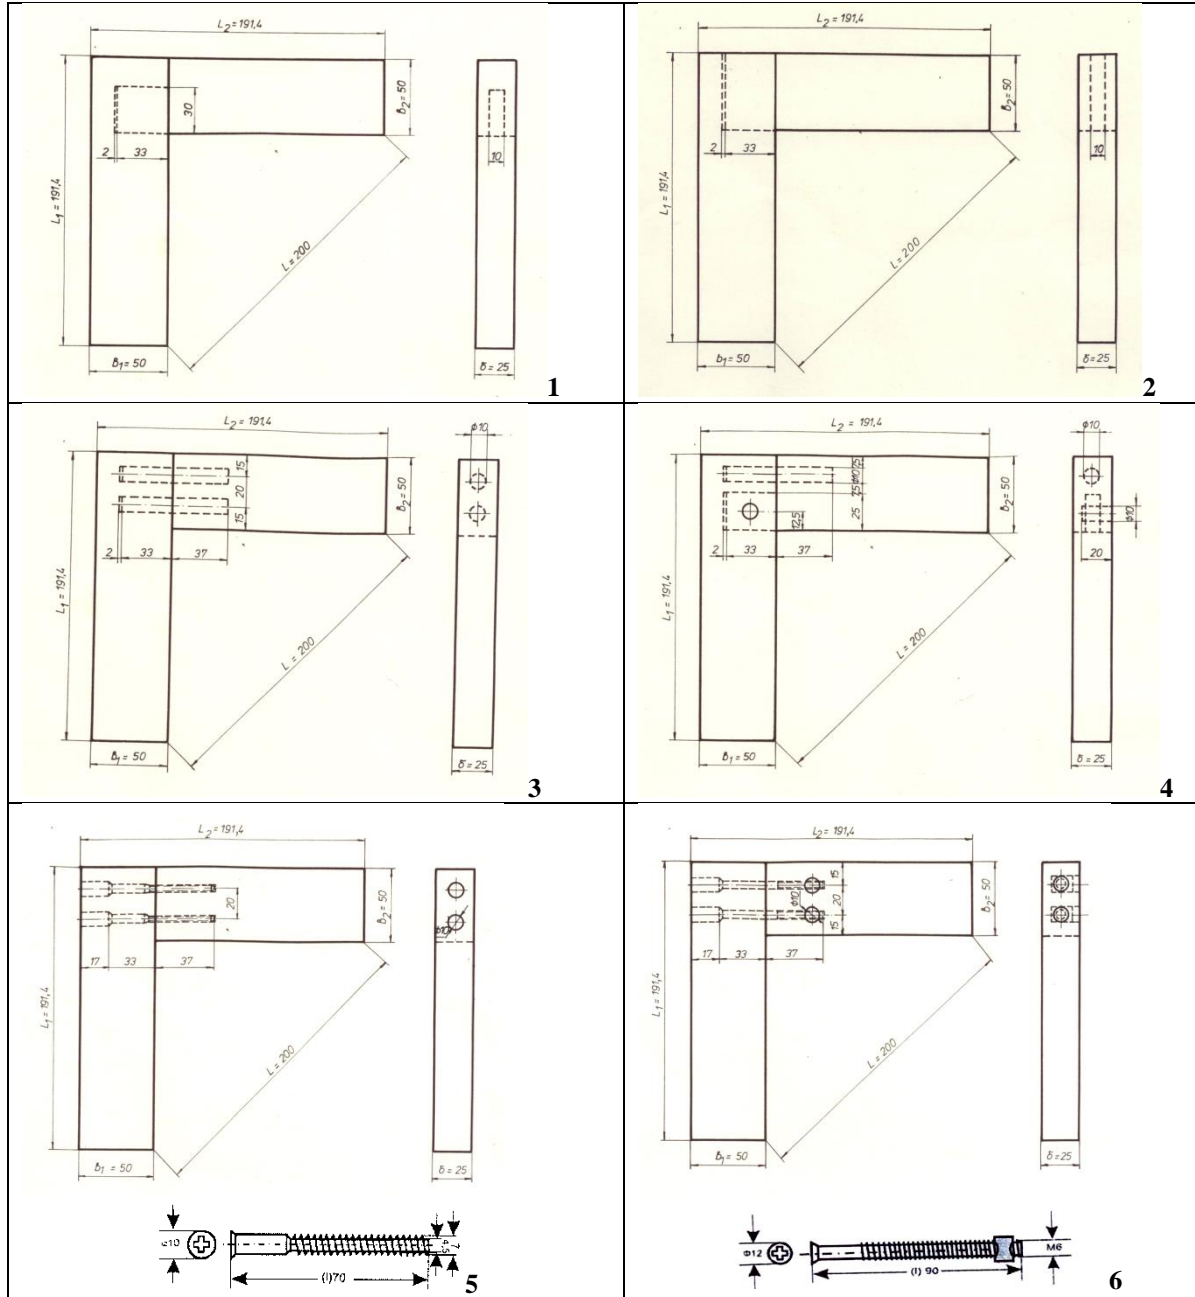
Type and parameters of the end corner joints: 1 – with blind stub mortise and tenon; 2 – with half open mortise and tenon; 3 – with 2 dowels ϕ 10 mm; 4 – with blind stub mortise and tenon with 1 dowels ϕ 10 mm and reinforced with second cross dowel; 5 – with two one-piece connectors “Confirmat”; 6 – with two connectors with screw and cross dowel.
